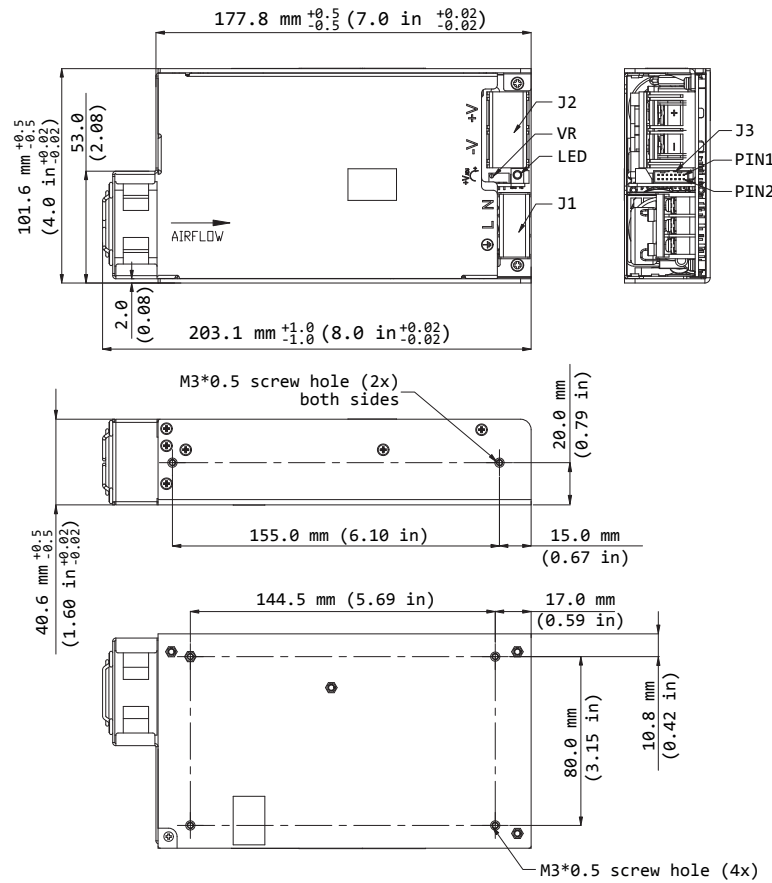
Dimensional drawing IMA-S600-xx-xxxxx
